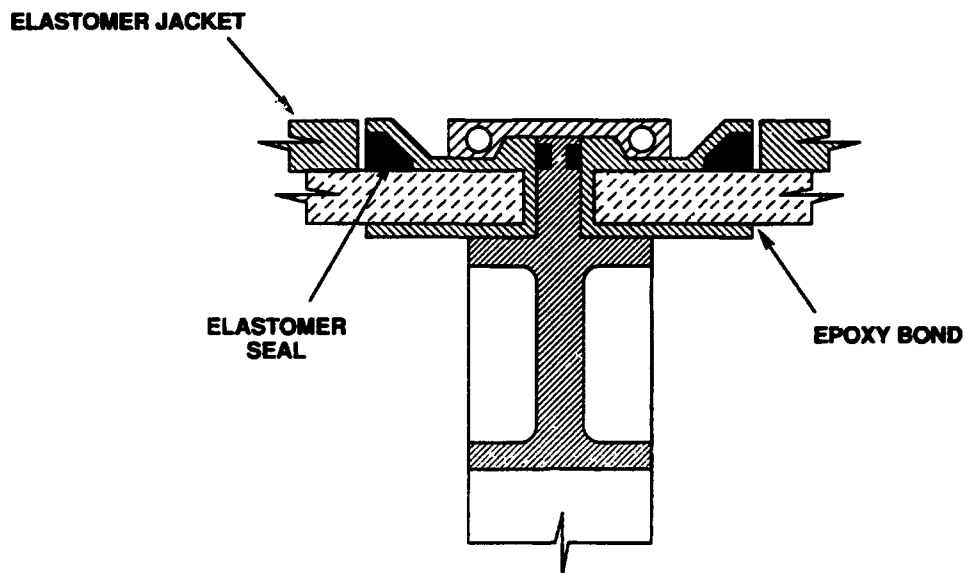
Optimized joint between ceramic cylinders incorporating the improved Mod 1 end caps.
